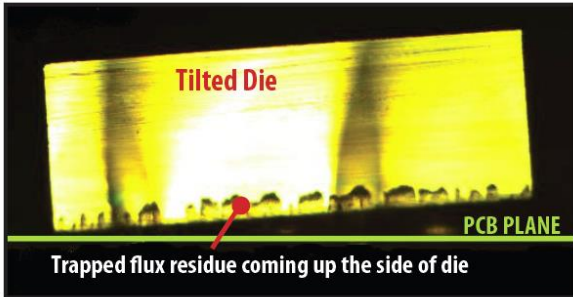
Side view of an eGaN FET with severe die tilt after soldering.
